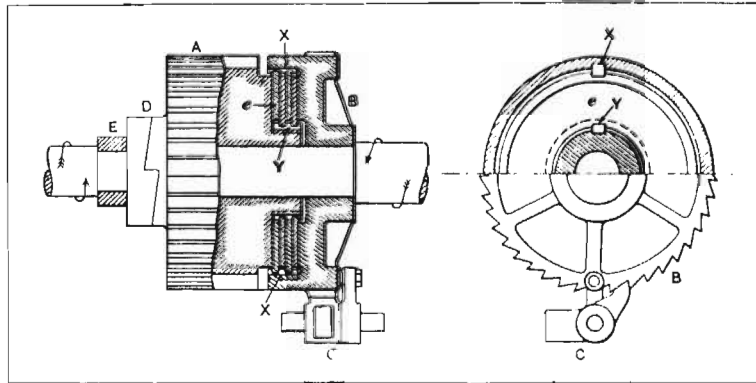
Weston Type of Automatic Brake for Use with Hoisting Machinery
